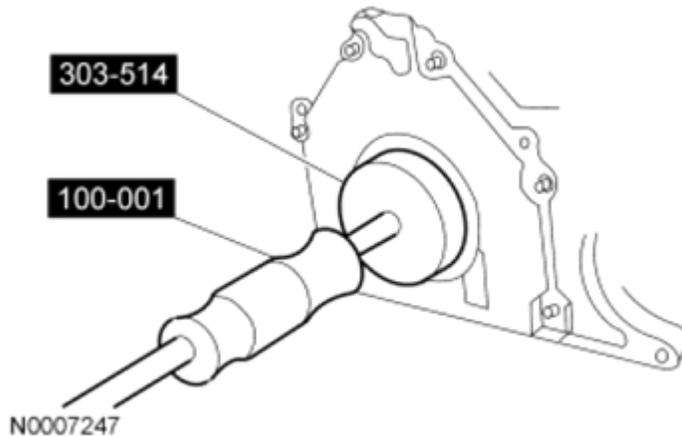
Removing Crankshaft Rear Oil Seal Slinger Using Special Tools
